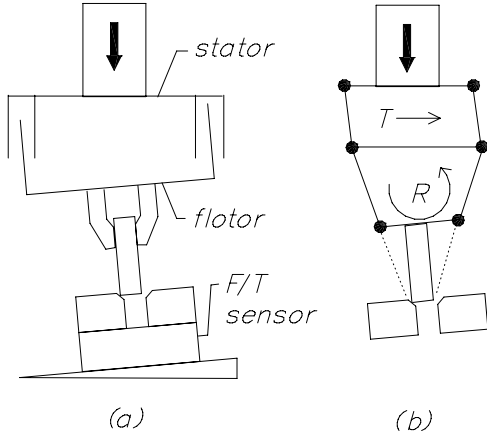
Peg-in-Hole Assembly using the Magic Wrist: (a) experimental arrangement showing 6-axis sensor used for measuring insertion forces and torques, (b) schematic of emulated RCC device allowing both translation and rotation of the peg about its lower end.
